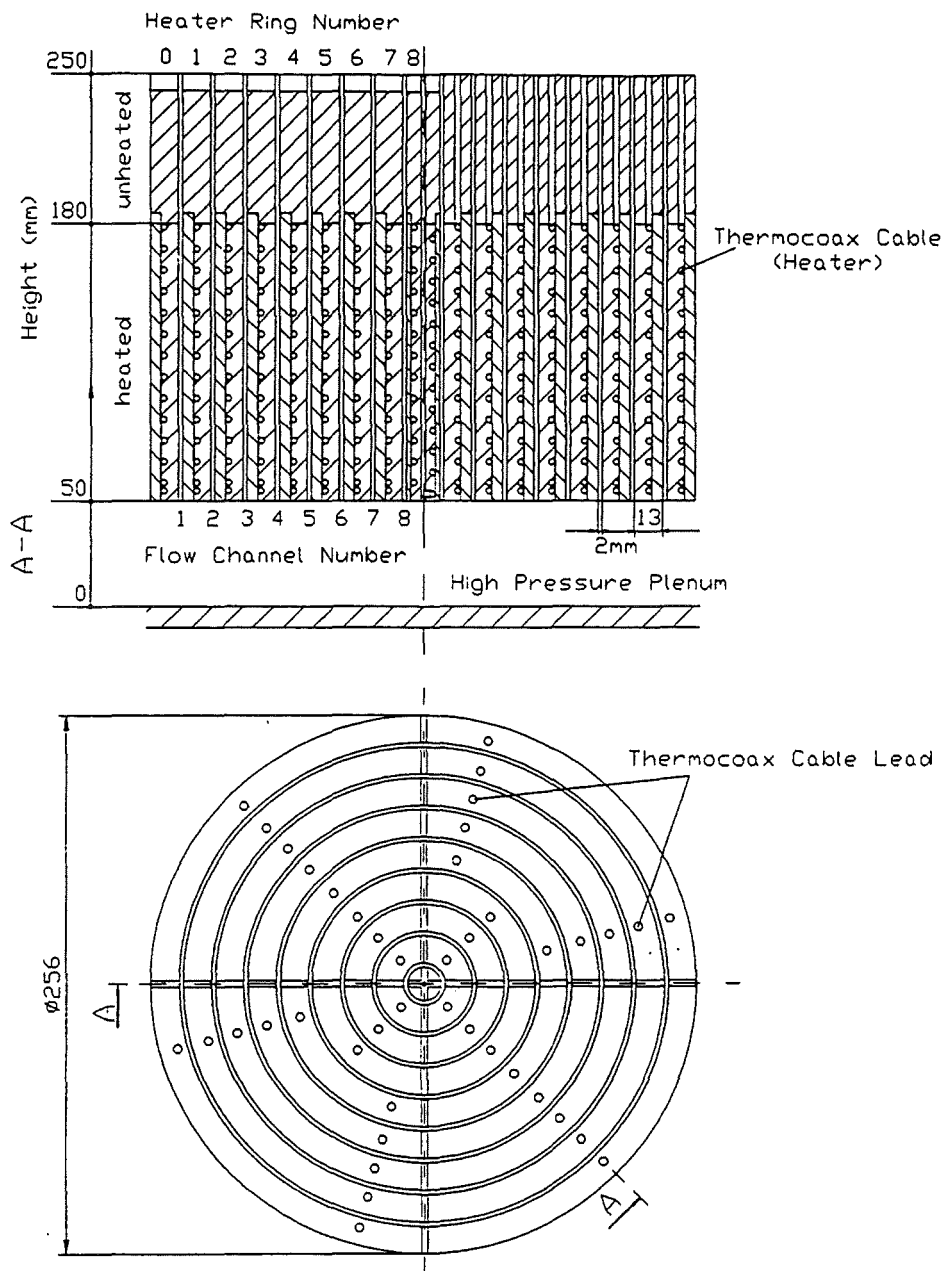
Vertical and horizontal cross sections of the RAMONA core
